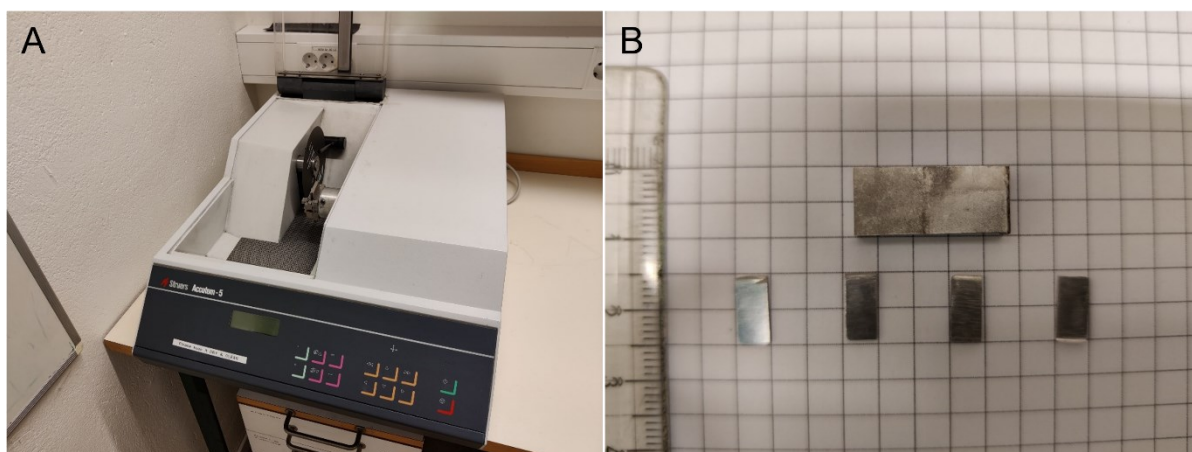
Equipment used for sample cutting. A: Accutom-5 disc-blade Saw, B: as-cut specimens (Z5 AS).
